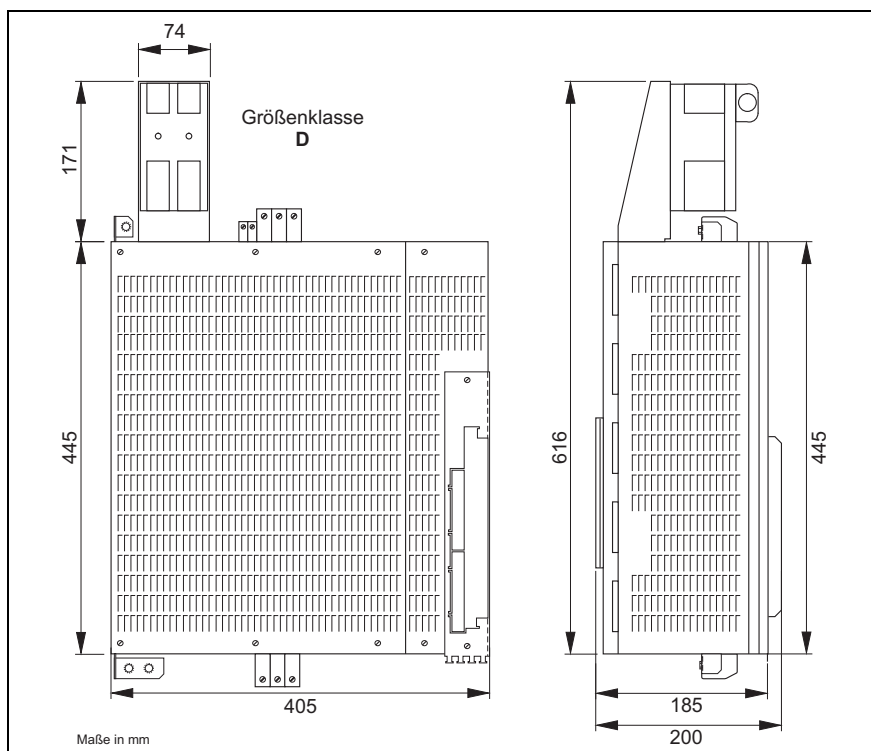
Dimension drawing AC drive converter with higher output rectifier (size D) with external fuse load disconnecter without cooler
